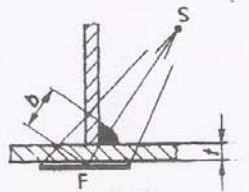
Test arrangement for penetration of fillet welds
